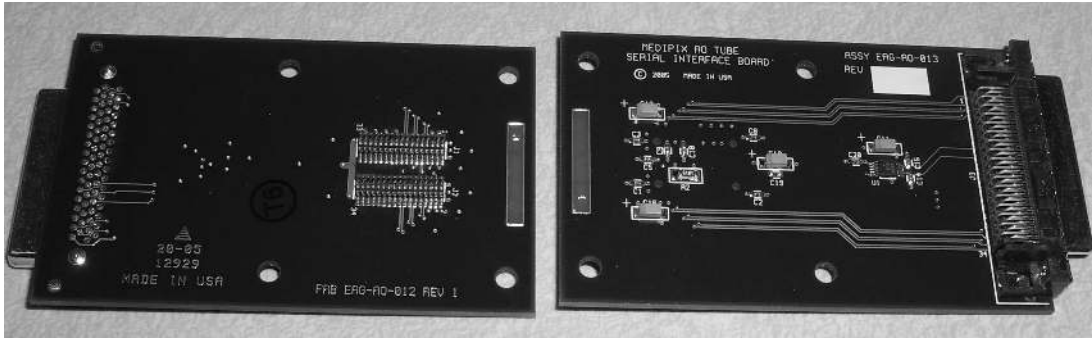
Serial readout boards that will be used for performance verification of bonded Medipix2/header assemblies prior to integration into a tube body. The two small 34-pin connectors visible on the bottom side of the board (at left) mate to the connectors on the back of the header. The larger 68-pin connector on the end of the board mates to an acquisition computer via a MUROS2 interface box (ref). Each board is approximately 2 in by 3 in. The long traces visible on the board on the right are the 100 Ω differential impedance LVDS lines.
